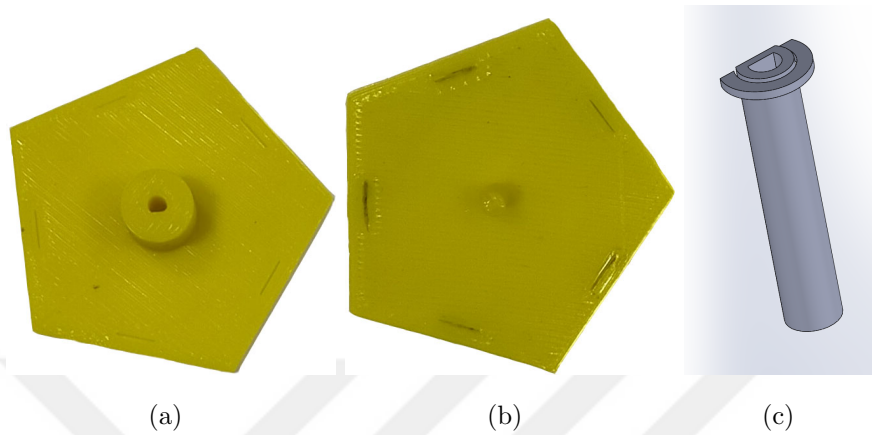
(a) Bellow Hub to mount the motor and connect wheel to the robot. (b) Bellow Lid. (c) Motor Cam Shaft
